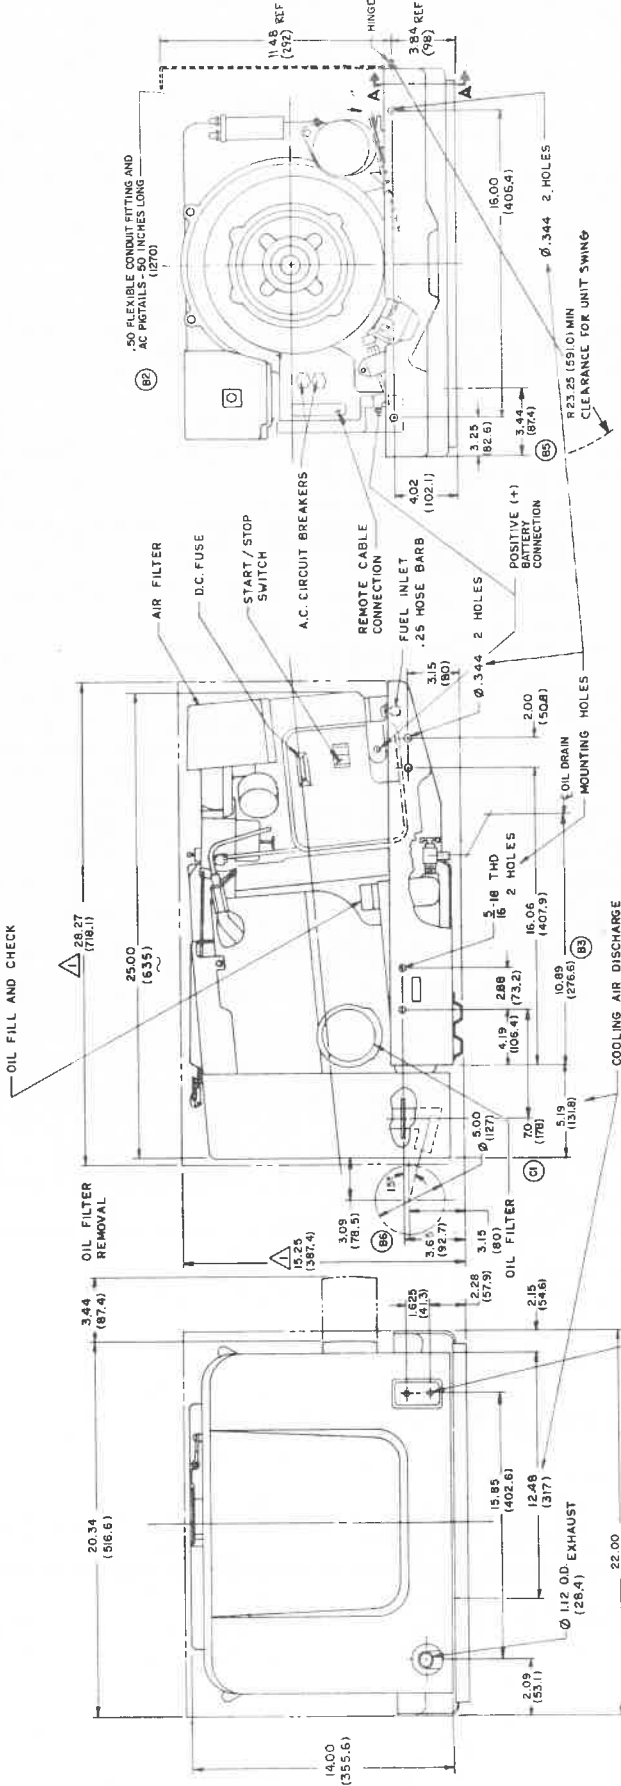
UNDER-FLOOR MOUNT (BGE SHOWN)
